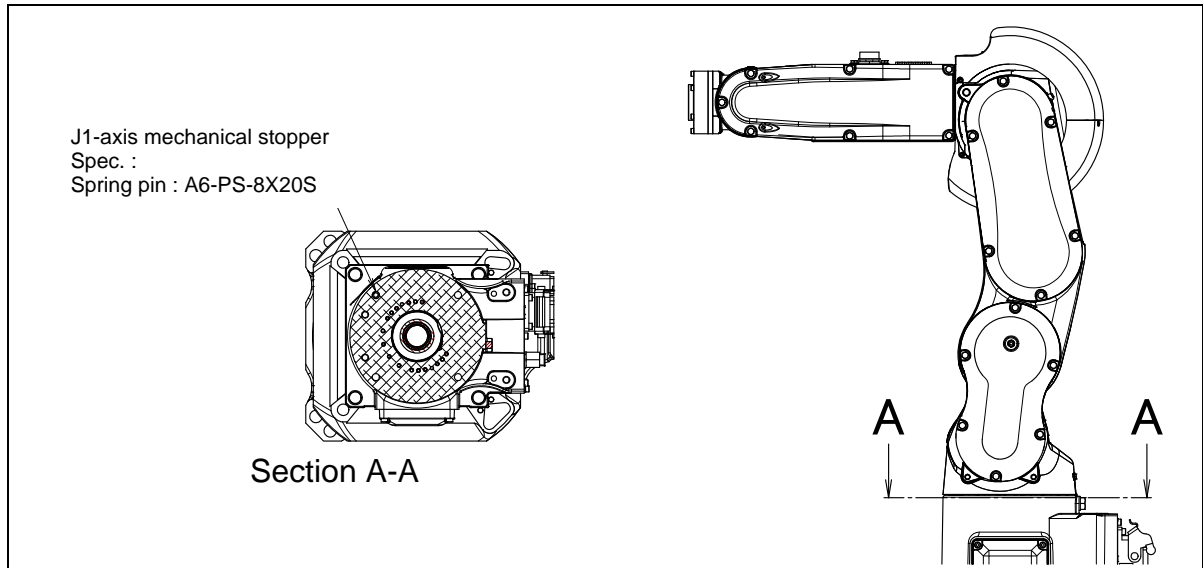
(a) Check of the mechanical stopper (CR-4iA)
